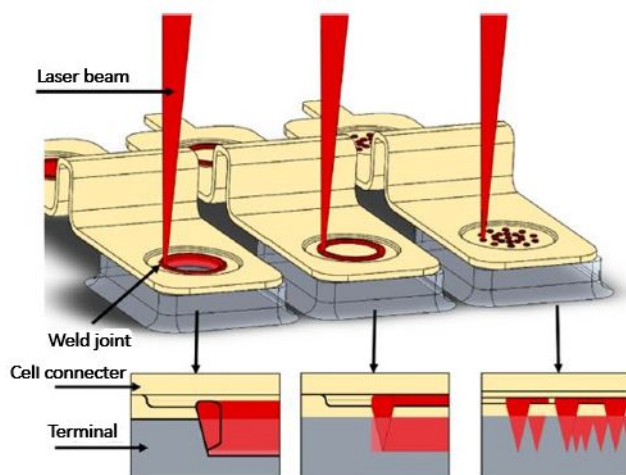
Standard methods of laser joining battery connections: fillet joint (left), lap joint (middle), multiple spot welds (right) [40]
